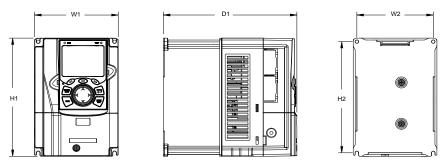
Wall installation diagram of VFDs of 220V 0.75–15kW and 460V 1.5–30kW
